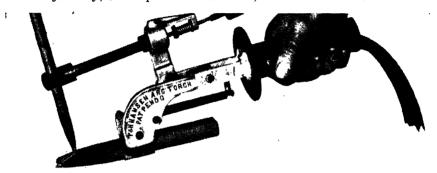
A carbon arc brazing torch (Courtesy of: Harnisch(eger Corporation)
